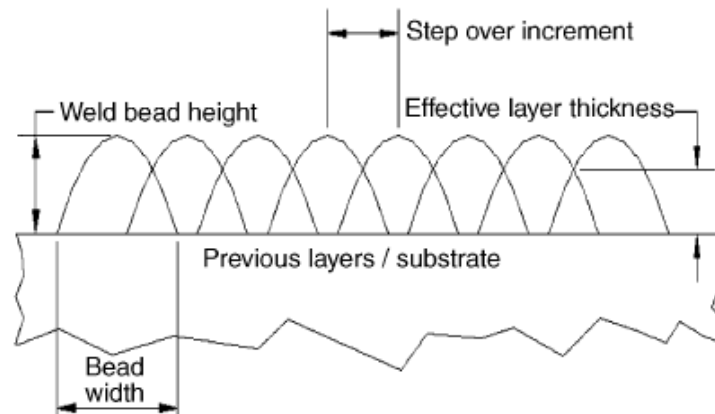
Face milling on weld deposition (Akula and Karunakaran, 2006)
